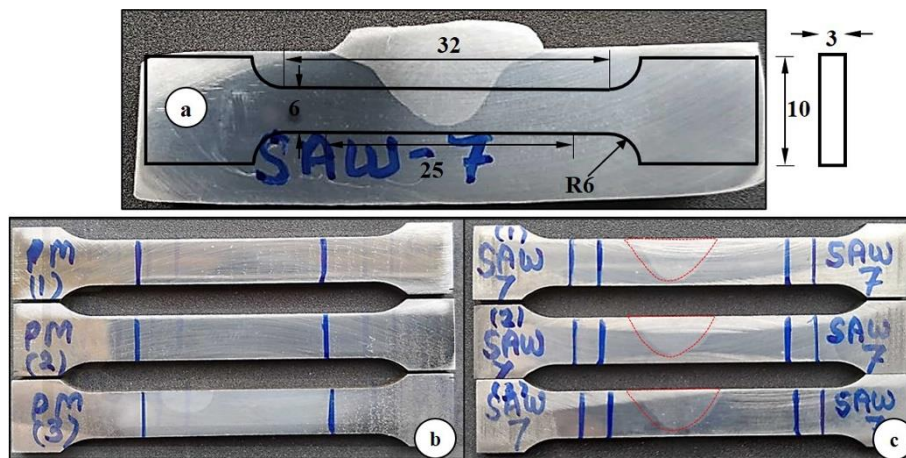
(a) Schematic illustration and location of subsize tensile specimen (b) Extracted parent metals tensile specimens and (c) Extracted specimens from SAW – ‘7’ coupon
